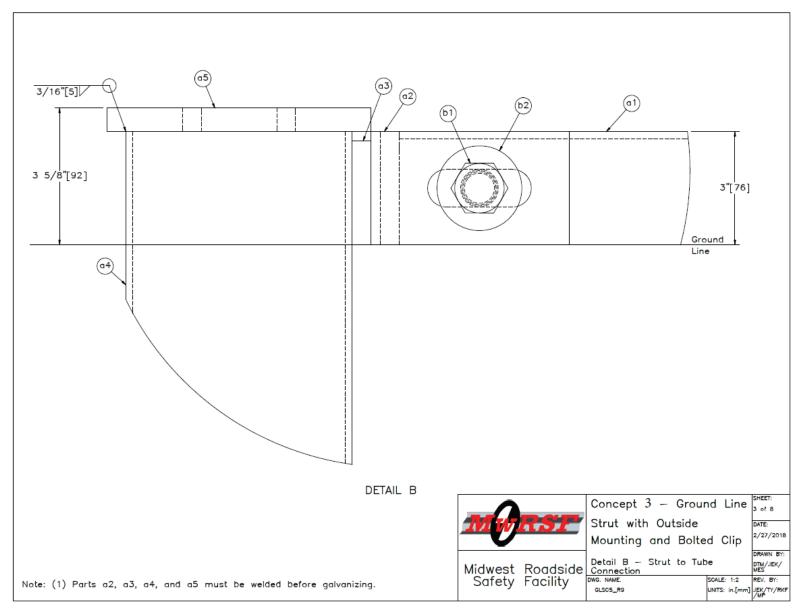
Ground Line Strut Design Concept No. 3 – Strut to Tube Connection
